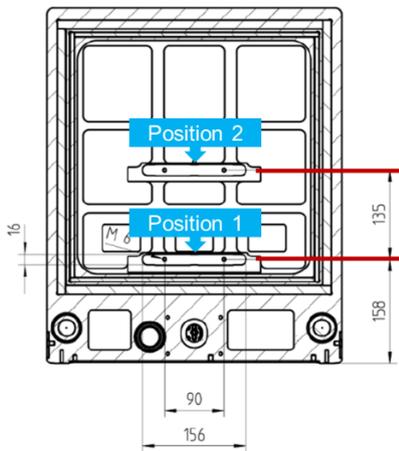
Two fixed positions in CMQ200/CMQ500 chamber with drawer table layout
